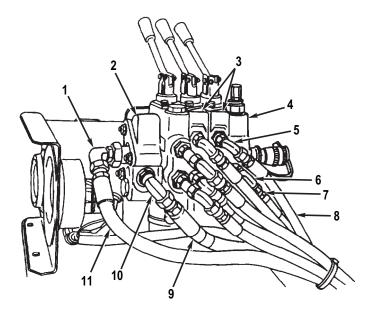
Hydraulic Control Valve (Rear Dolly) Disconnection.
